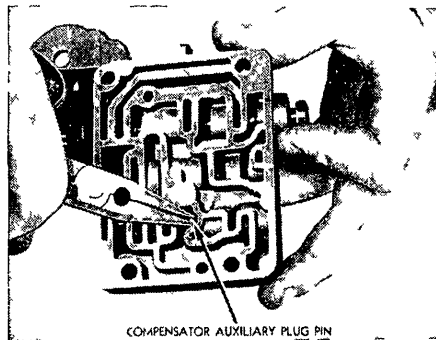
Remove stop pin (needle bearing roller) holding compensator auxiliary plug in place
